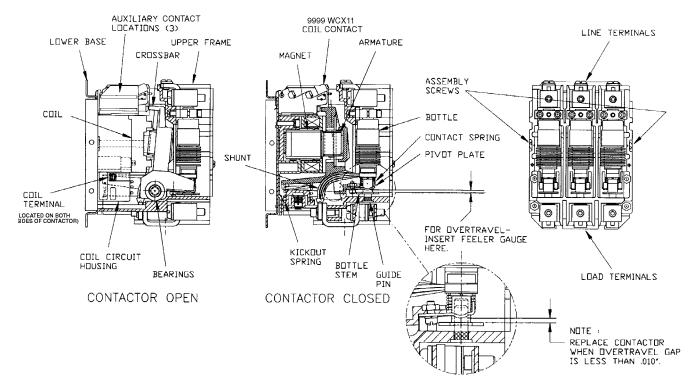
Size 4 Vacuum Contactor, Class 8502 Type WFO
